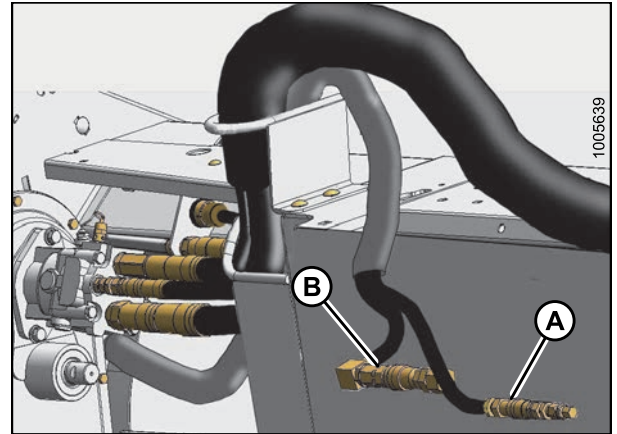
Auger/Reel Pressure and Auger/Reel Return Hose Couplers – 14-Ft. and 16-Ft. Header Shown (18-Ft. Similar)
